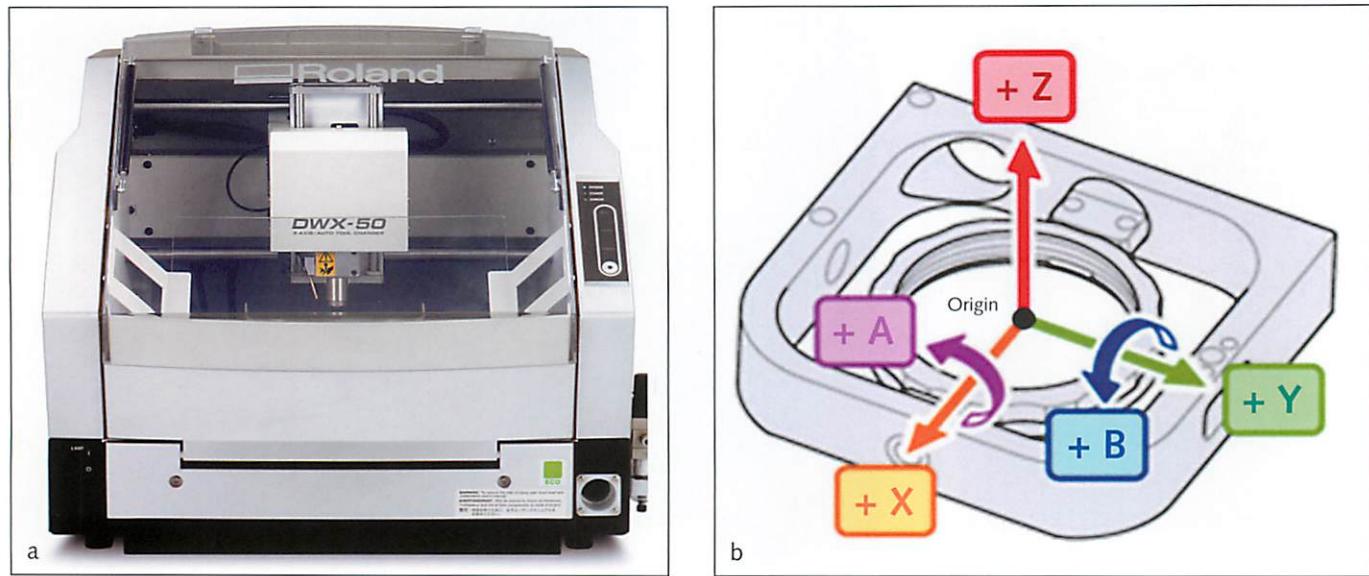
and b Roland DWX-50 milling center: (a) external view; (b) view of axes.
